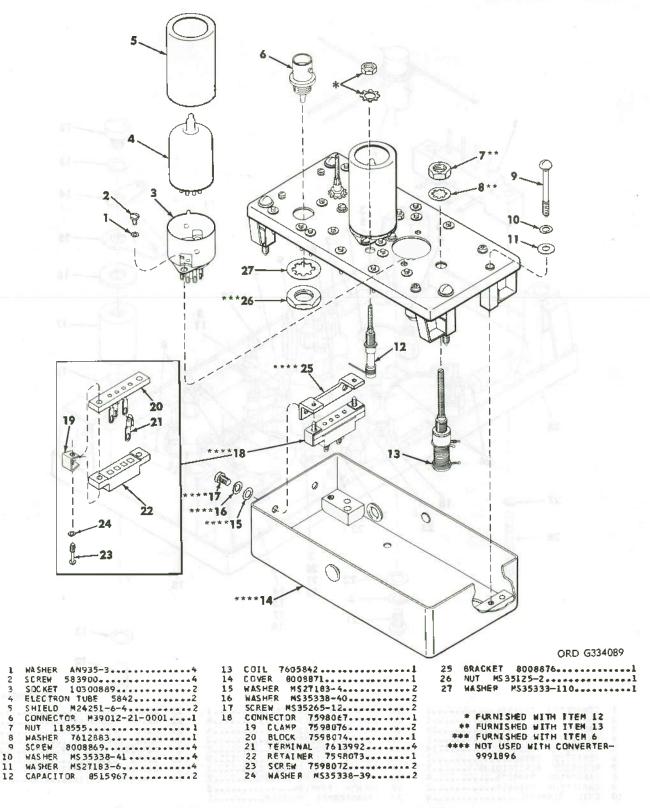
FILTER ASSEMBLY /9142934 AND 9142936/-EXPLODED VIEW /SEE FIGURE 123 FOR NEXT HIGHER ASSEMBLY/
